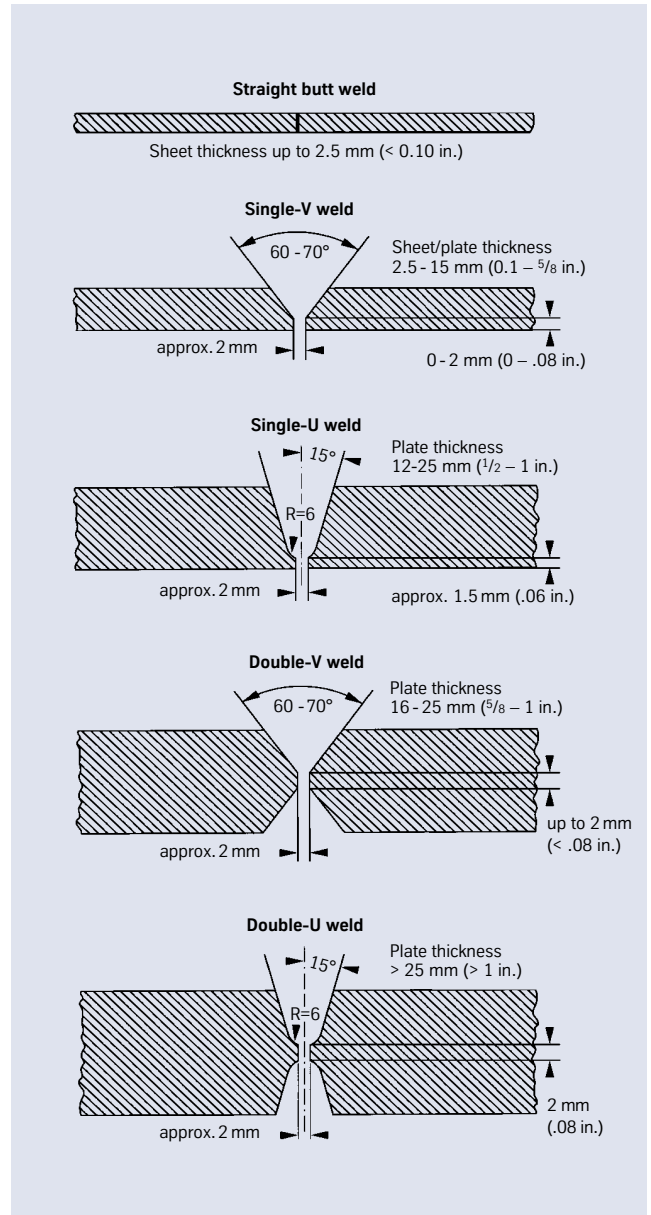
Edge preparation for welding of nickel-base alloys and special stainless steels.
